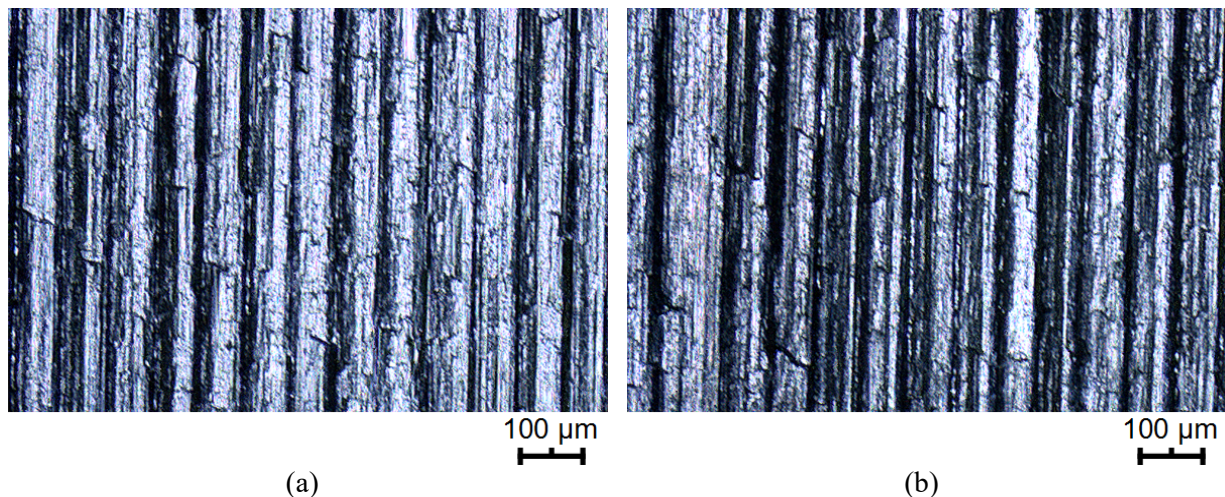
Surface characterization (LSM) and profiles of (a) workpiece 1, (b) workpiece 2
